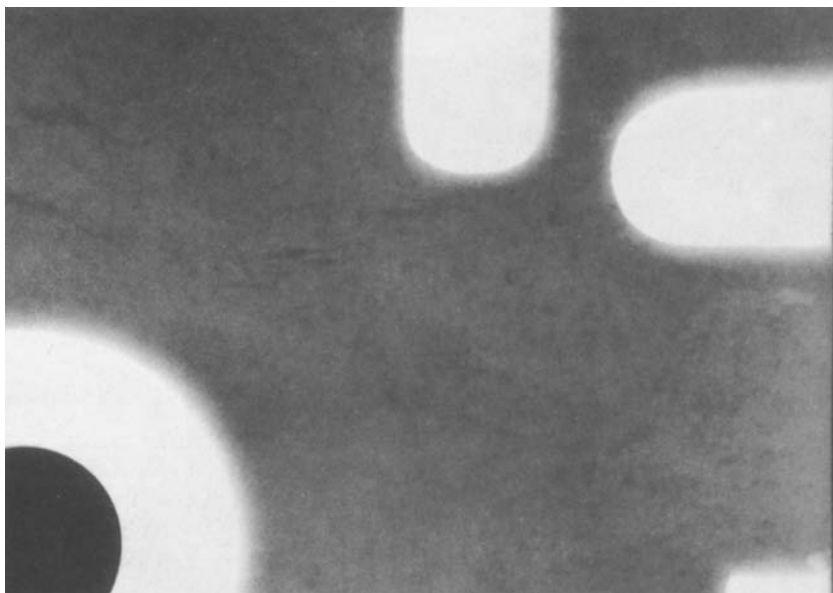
Micro shrinkage (layer porosity) in a magnesium alloy casting
